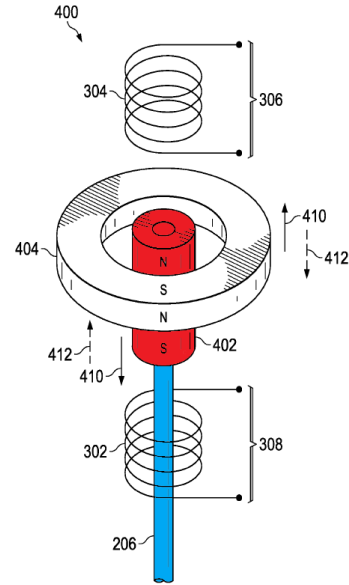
Schematic drawing of a counterbalancing solenoid mechanism. Relevant components: 206 = inner cutting tube, 302 = proximal coil, 304 = distal coil, 402 = movement generating magnet, 404 = counterbalancing magnet. Adapted from: [61]
